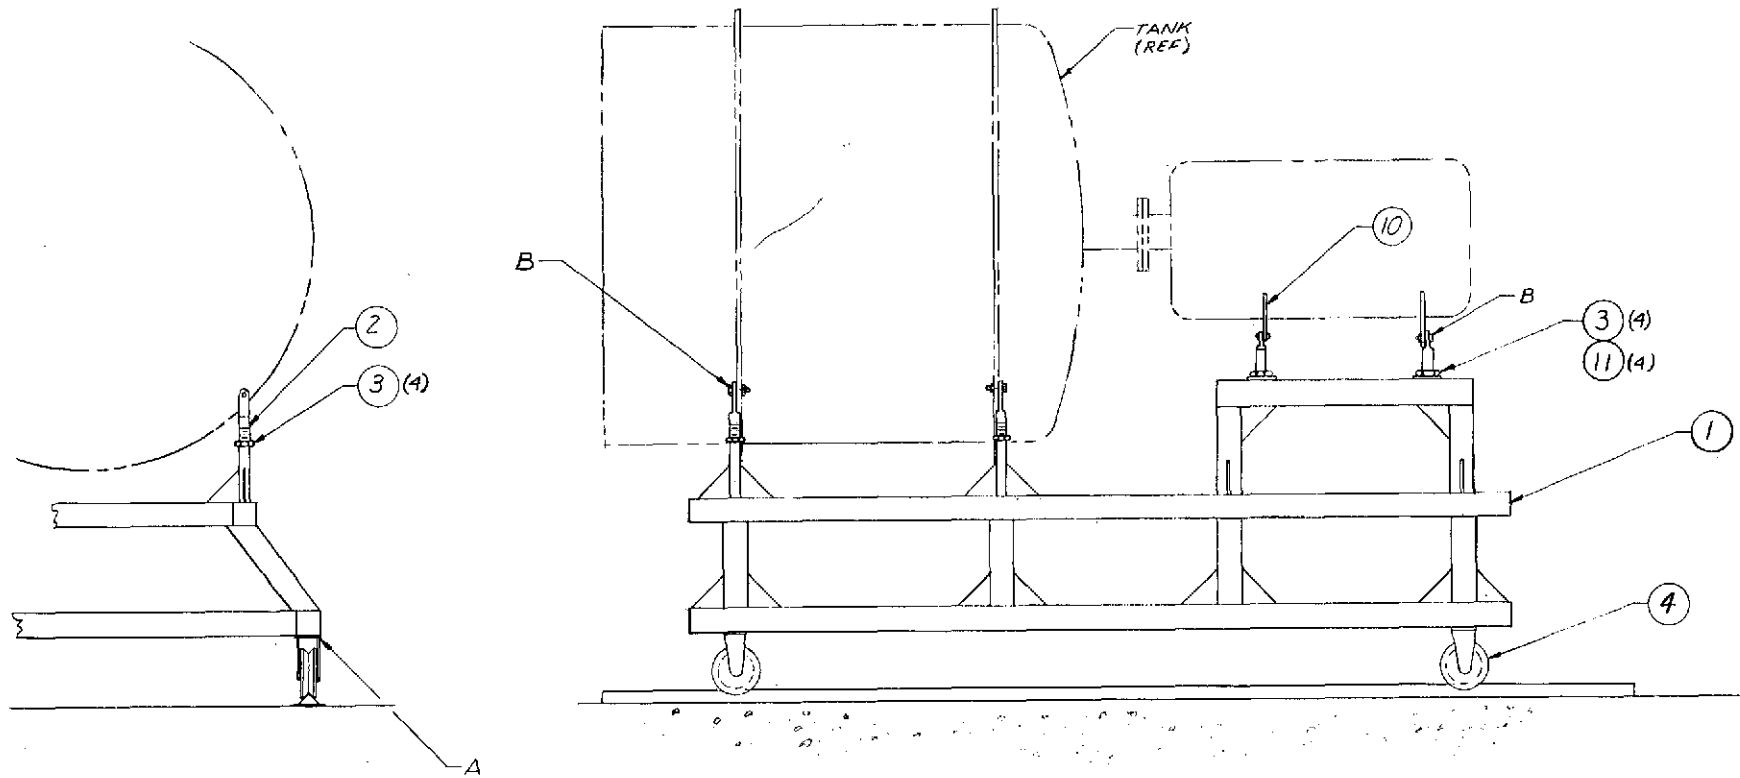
Frame, weldment, vacuum tank support
